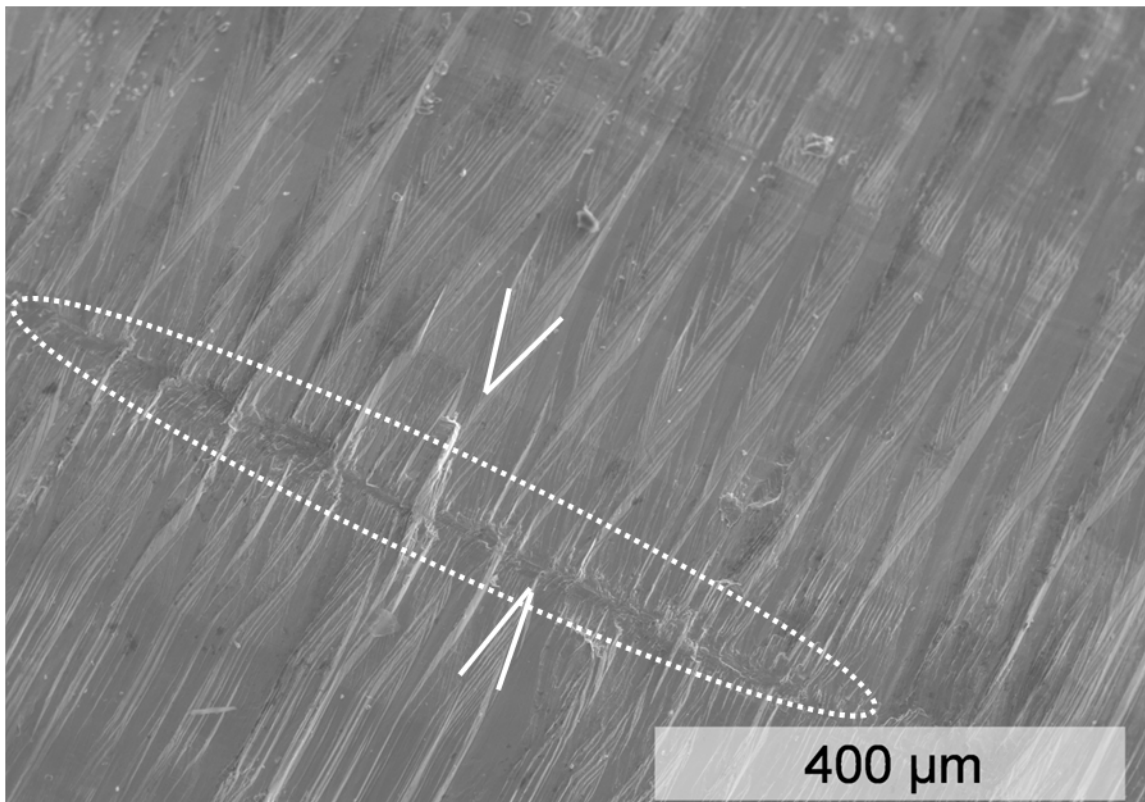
SEM image of CM132 E {111} macroscopic fracture plane. Fracture plane is characterized by jagged striations indicating brittle fracture. The river marking on the fracture surface point towards internal defects as indicated by the white arrows. The internal defect is circled by the dotted line.
